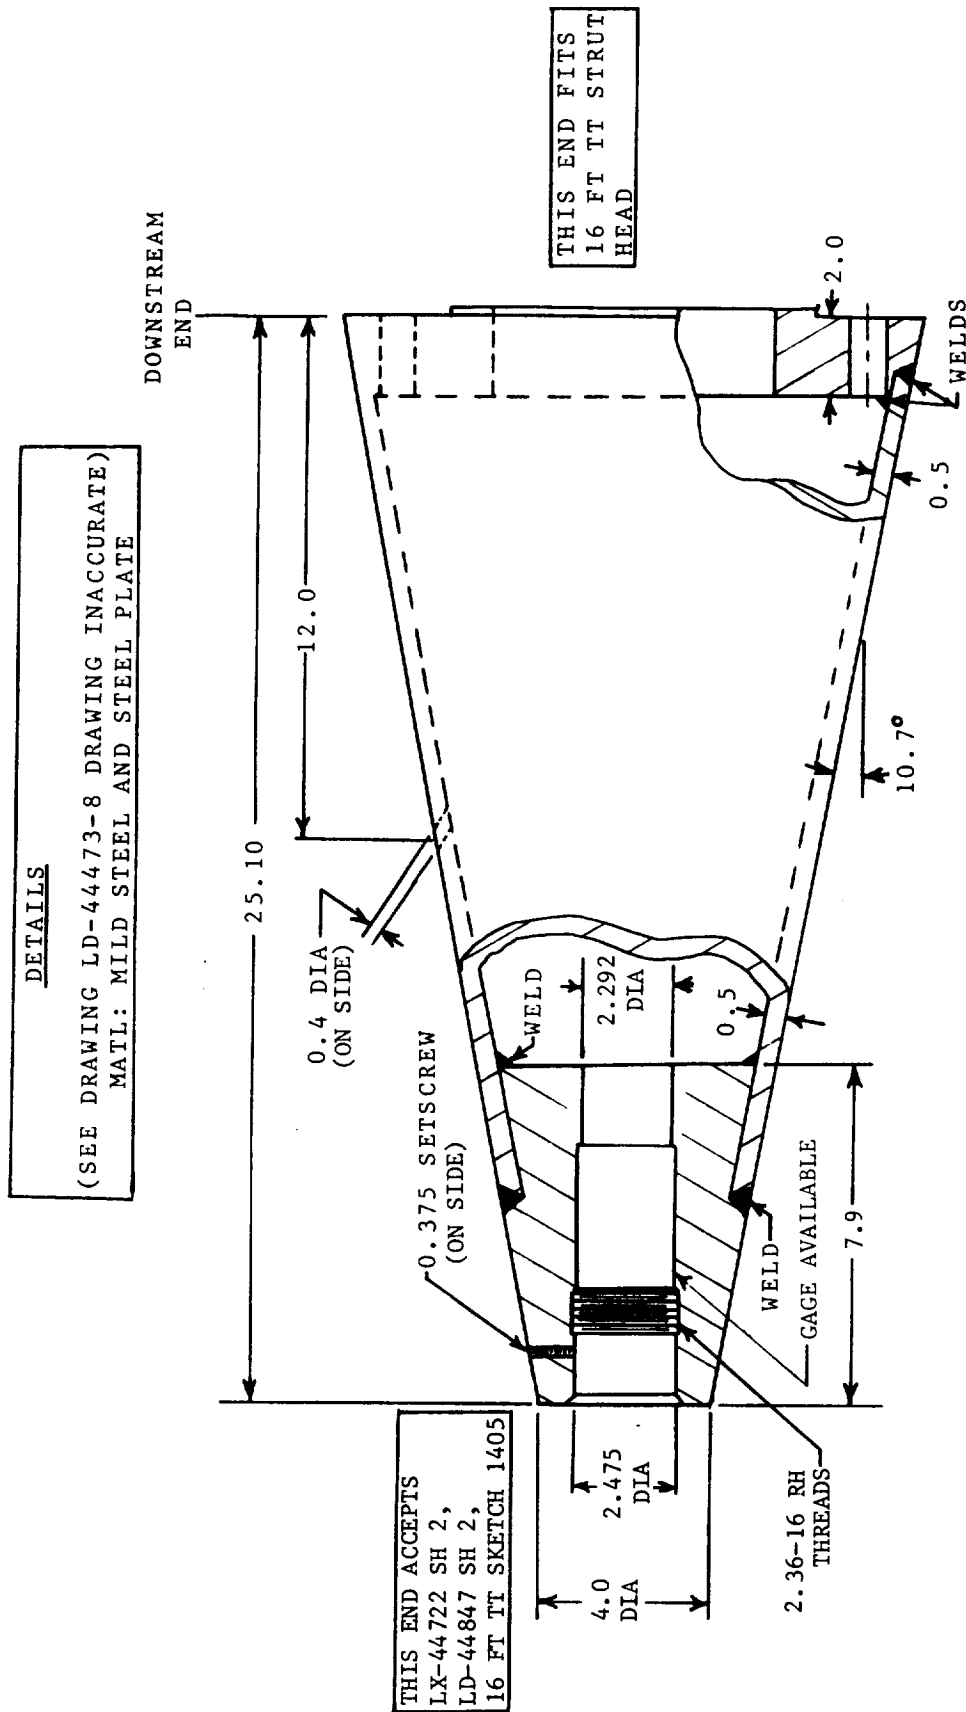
Sketch of short sting cone LD-44473-8. (All dimensions are in inches unless otherwise indicated.)
